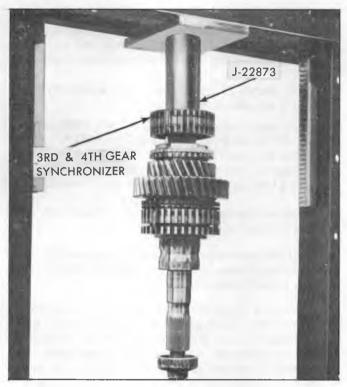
Q--Installing 3rd and 4th Gear Synchronizer
